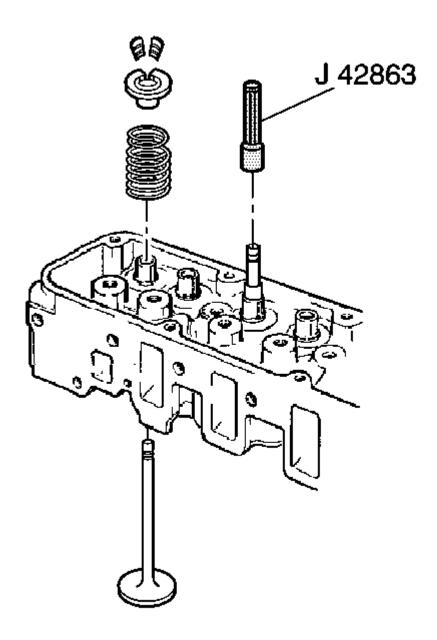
Removing Valve Stem Oil Seal Courtesy of GENERAL MOTORS CORP.
